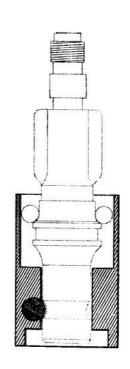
MEASURING THICKNESS OF ADJUSTING WASHER
